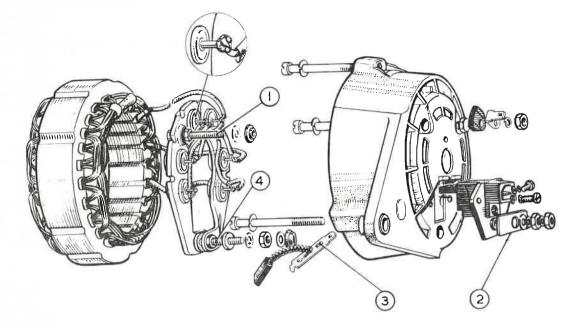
Slip-ring end, showing heat sinks withdrawn
